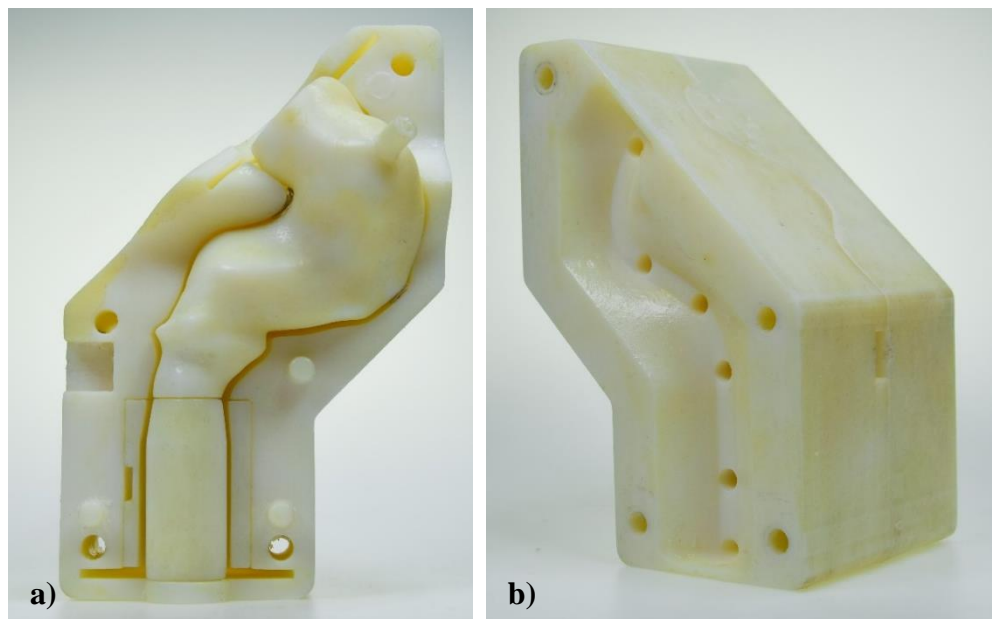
a) internal view of the mould, showing the mould cavity and core component; b) isometric view of the manufactured mould, showing the silicone reservoir and sprue.
